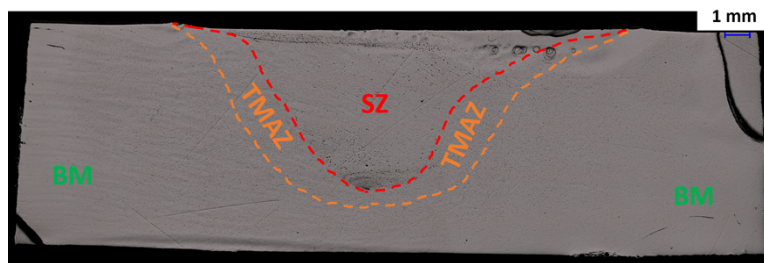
Irradiated 304L SS friction stir weld cross section.
